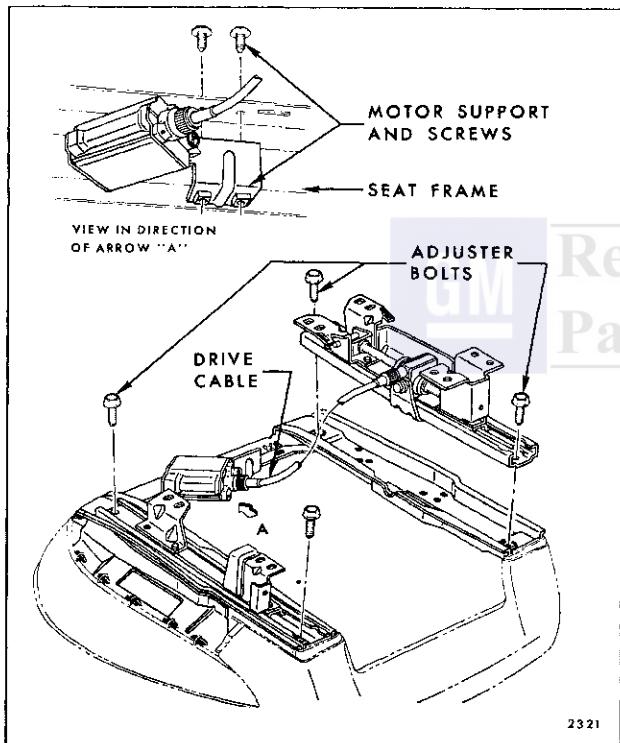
Power Horizontal Bucket Seat Adjuster Removal
